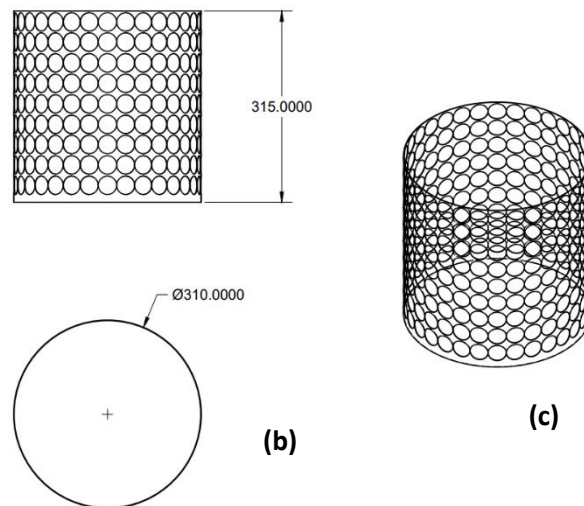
1) Isometric projections of Perforated inner cylinder a) Front view b) Top view c) Isometric view
